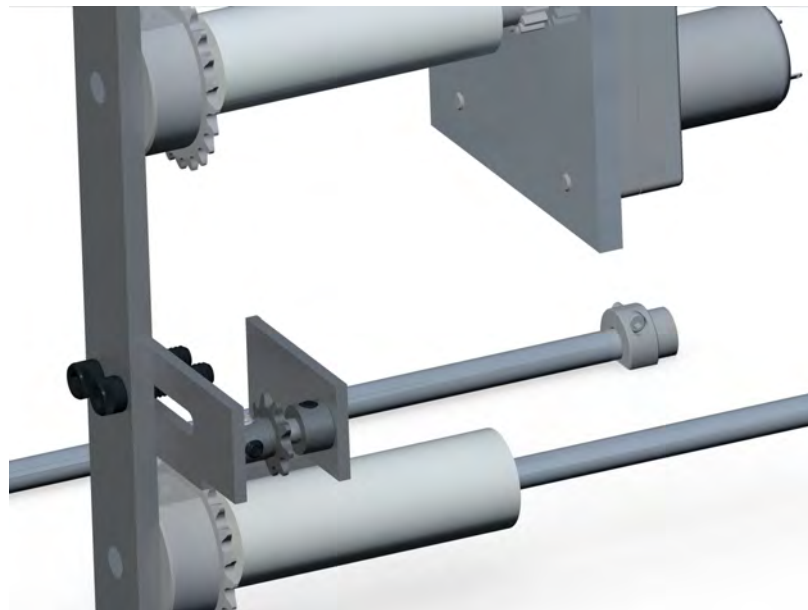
Chain Tensioner Assembly. [CREO Rendering]
